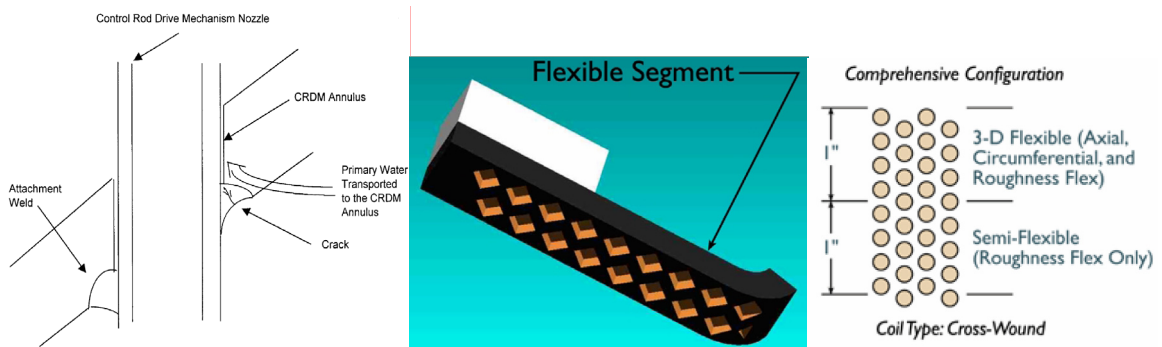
Defect location in J-Groove welds for ET inspection and flexible array coil for J-groove weld inspection (Lara et al. 2002).
